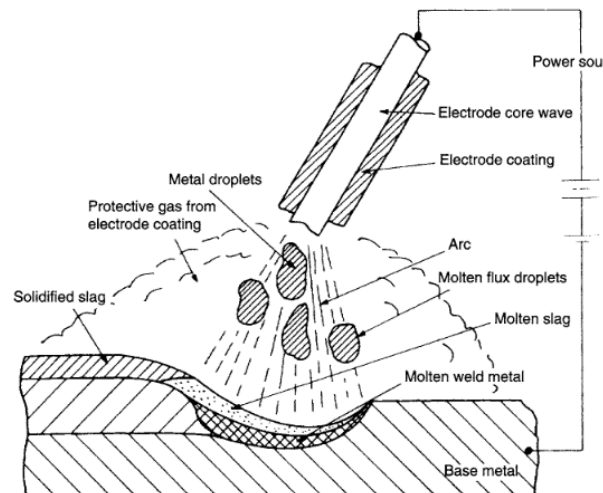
Schematic Illustration of the shielded metal arc welding (SMAW) process [3, 4].
